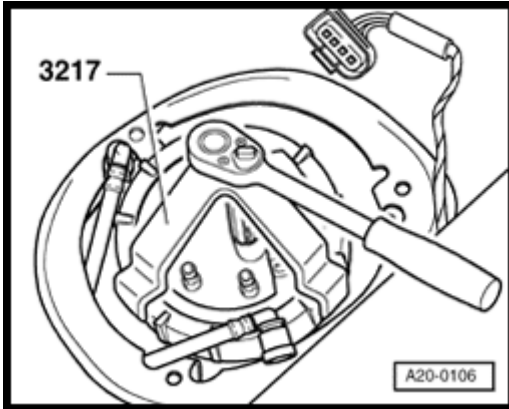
Removing/Installing Union Nut With Wrench 3217
